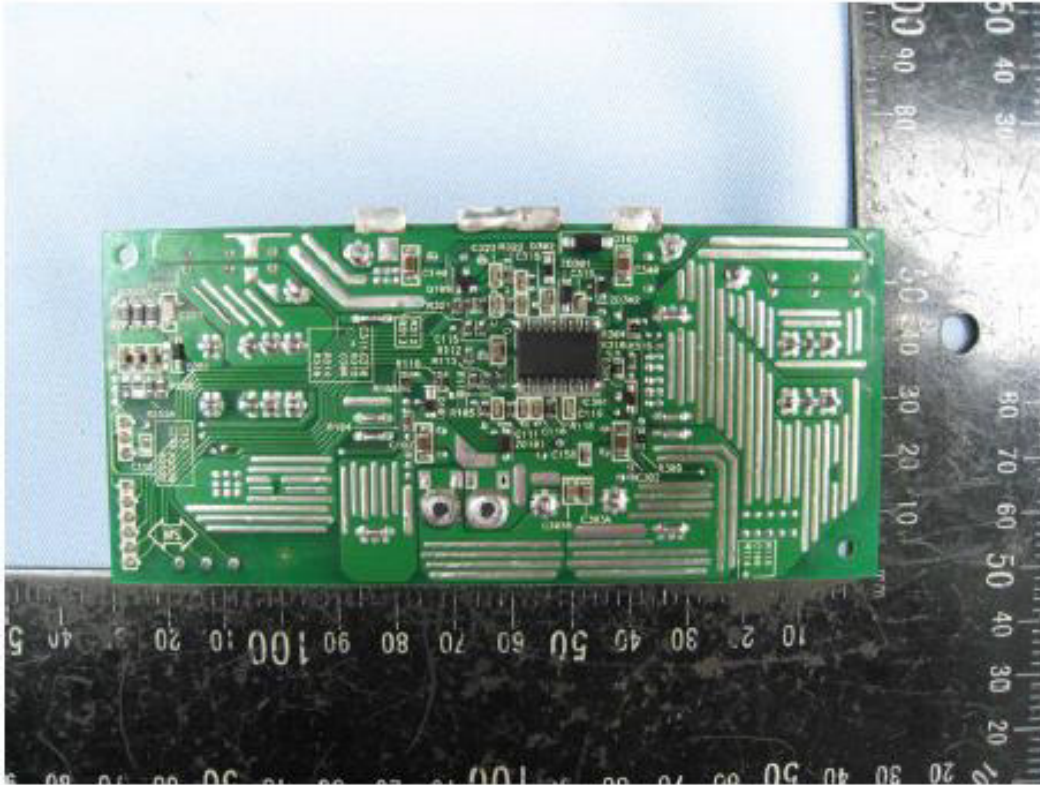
PCB type DC-4972 (GPS-1000DB XX)
